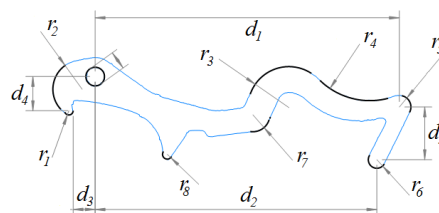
Legend of the dimensions reported in Table 2 and Table 3.
